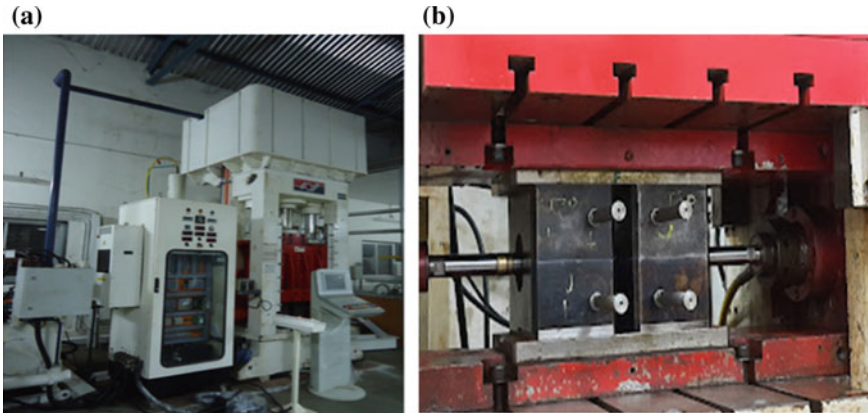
a Hydroforming setup (250 T hydraulic press) and b die setup for 35 mm OD tube
